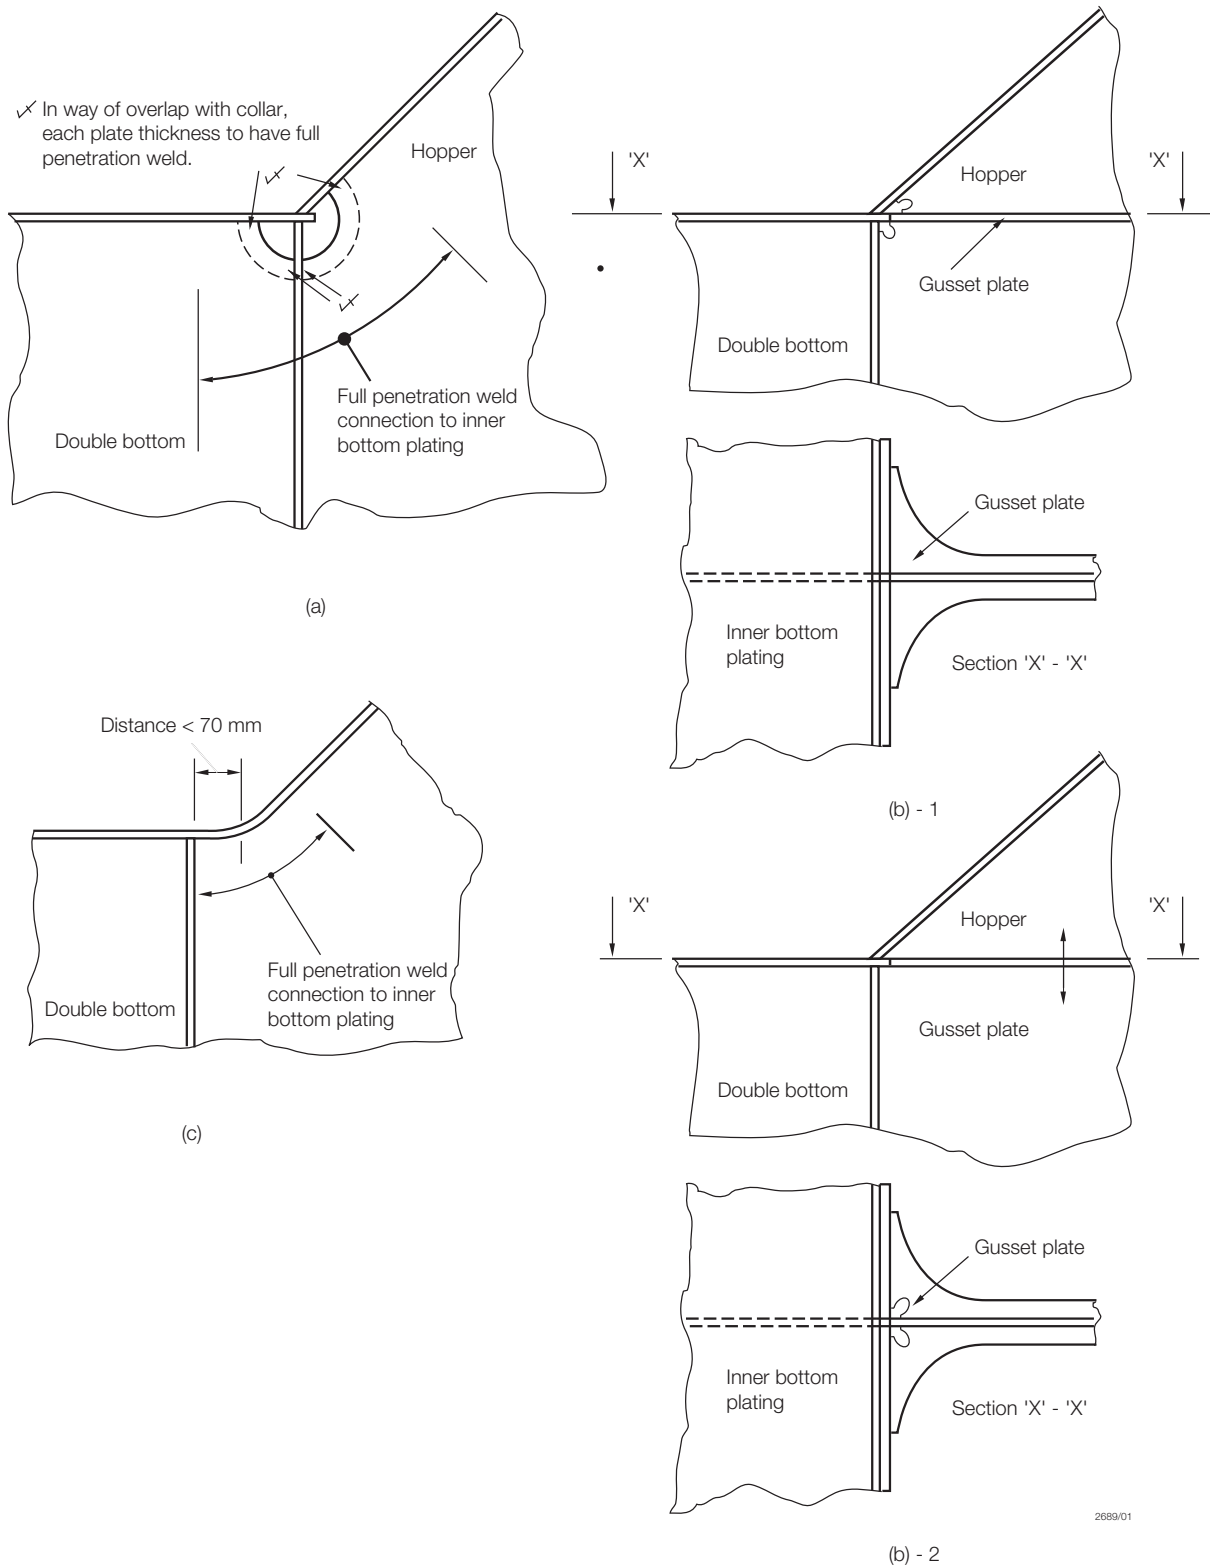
Connection at intersection of double bottom and hopper
